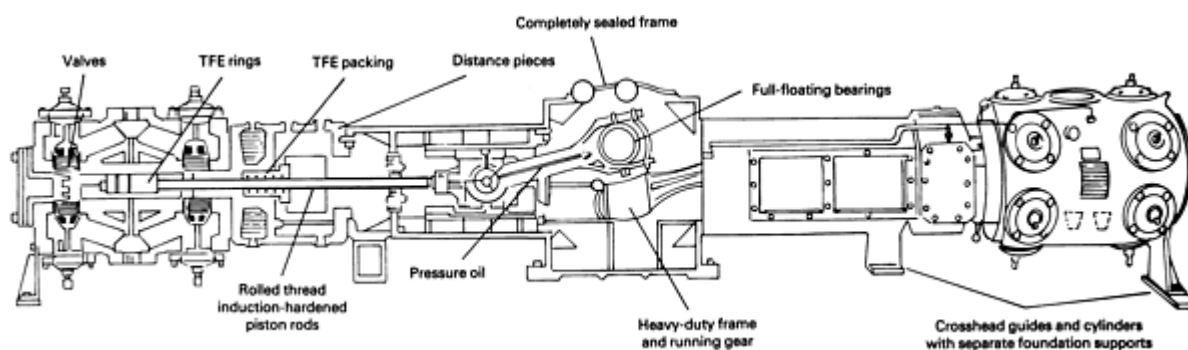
Cross section of crosshead-type reciprocating compressor. Source: Dresser-Rand
